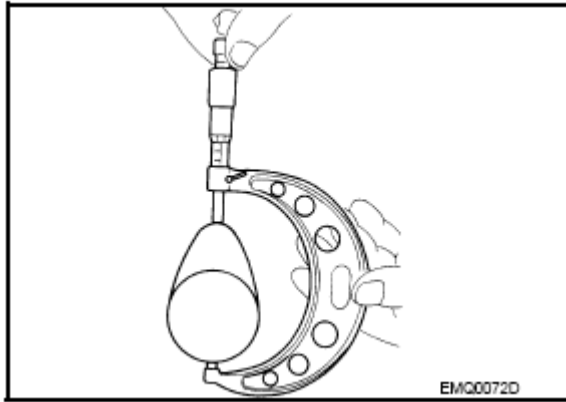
Measuring Camshaft Cam Height Using Micrometer
